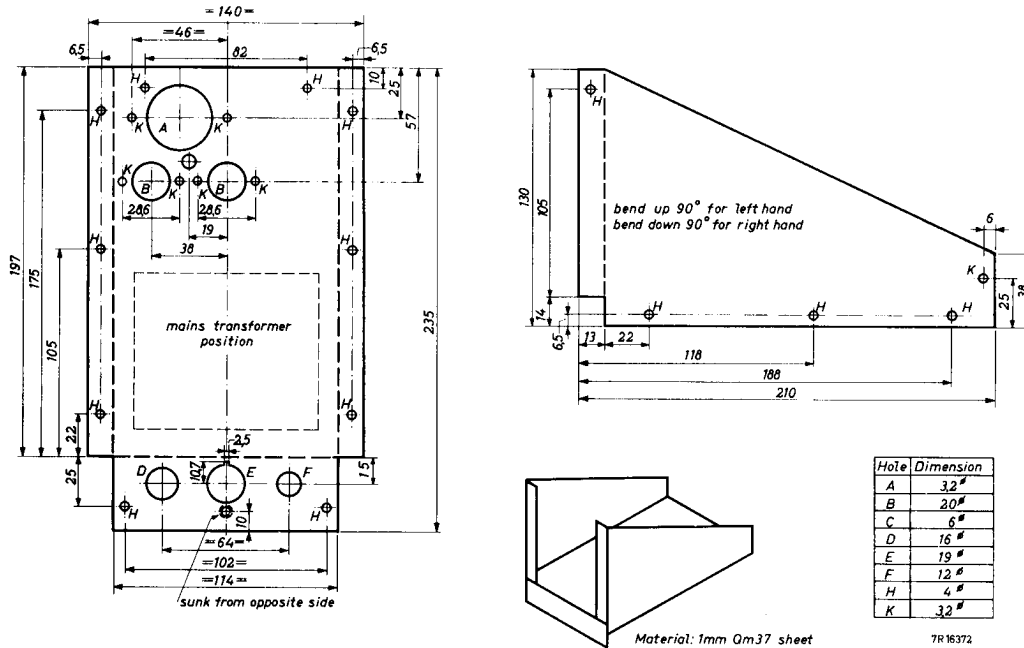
Power supply unit, mechanical. The chassis sections should be bent up at  $90^\circ$  at all dotted lines unless otherwise stated.
